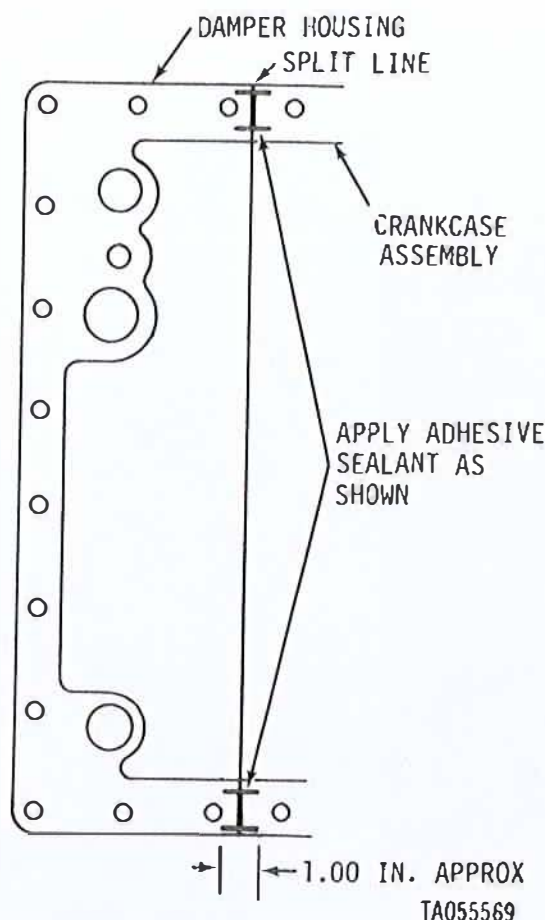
Bottom flange of damper housing and crankcase showing sealant application.
